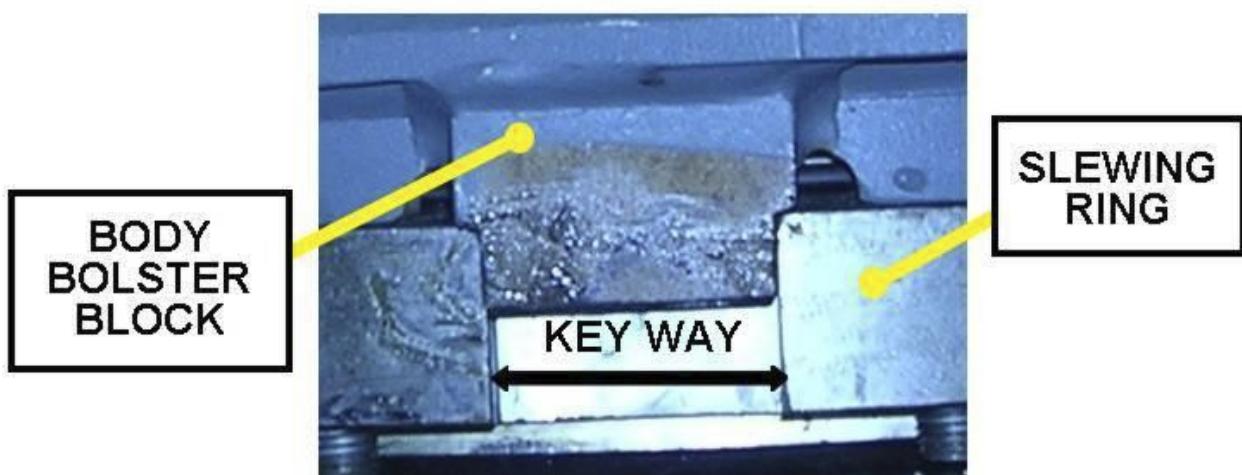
BODY BOLSTER BLOCK IN THE SLEWING RING KEYWAY MATCHING
